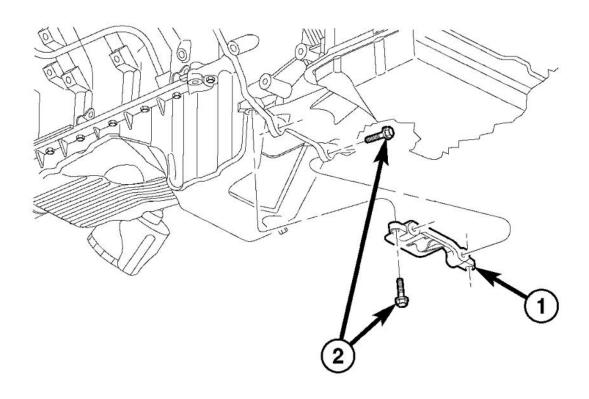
Engine Support Tool Courtesy of CHRYSLER LLC
